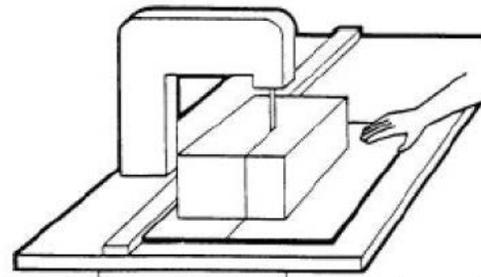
Cutting Formed AVONITE Flex Sheet Part on Band Saw
